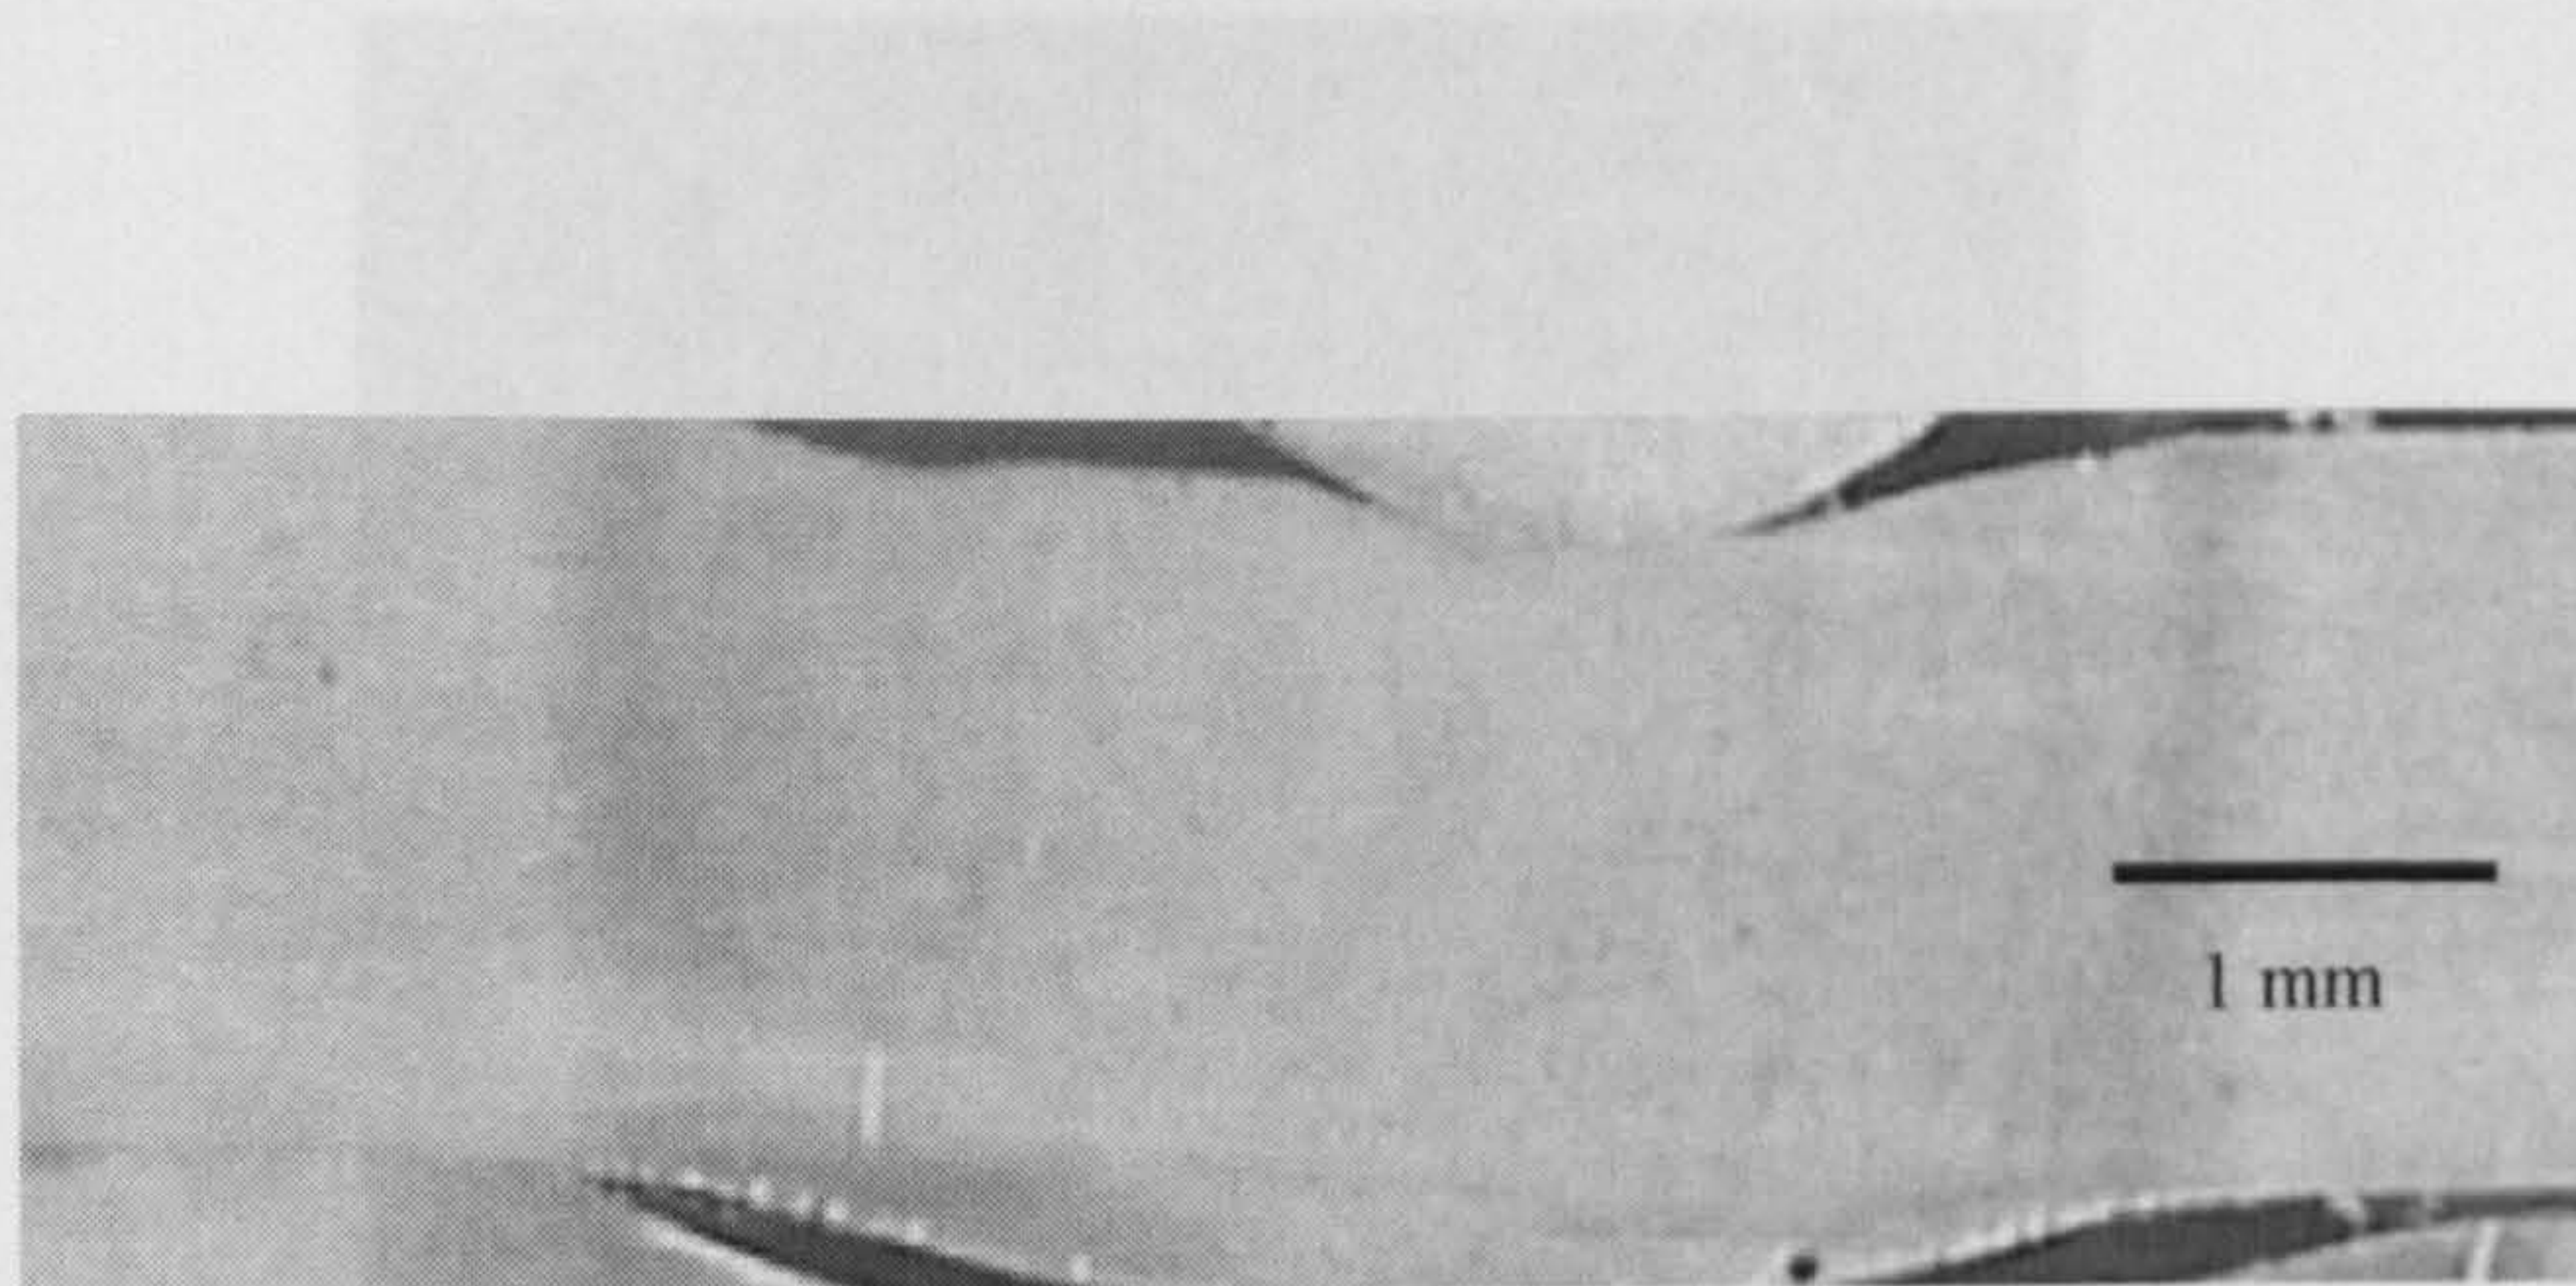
Micrograph of 2mm AA5083 bead-on-plate conduction weld with practically no pores; weld speed = 500 mm/min
